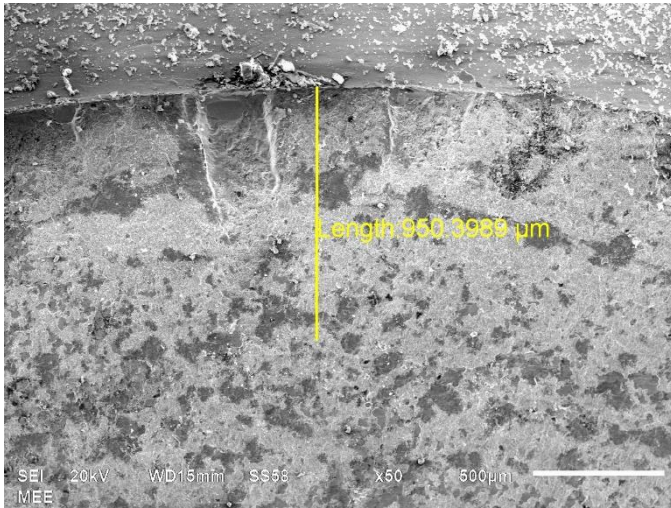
50X Fracture Surface near Fracture Origins
